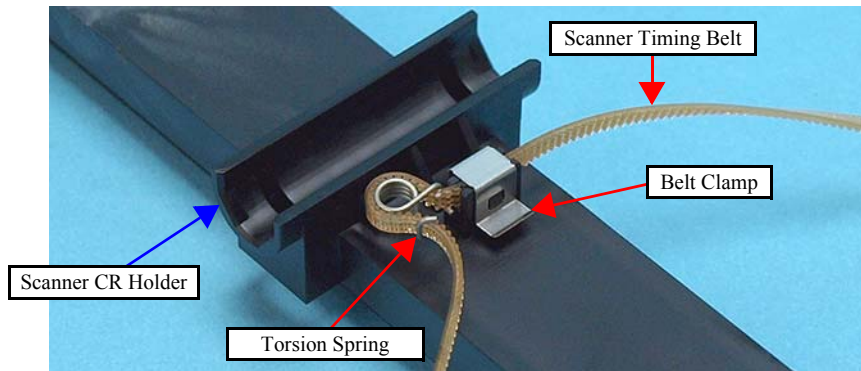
Removing the Scanner Timing Belt and Torsion Spring
